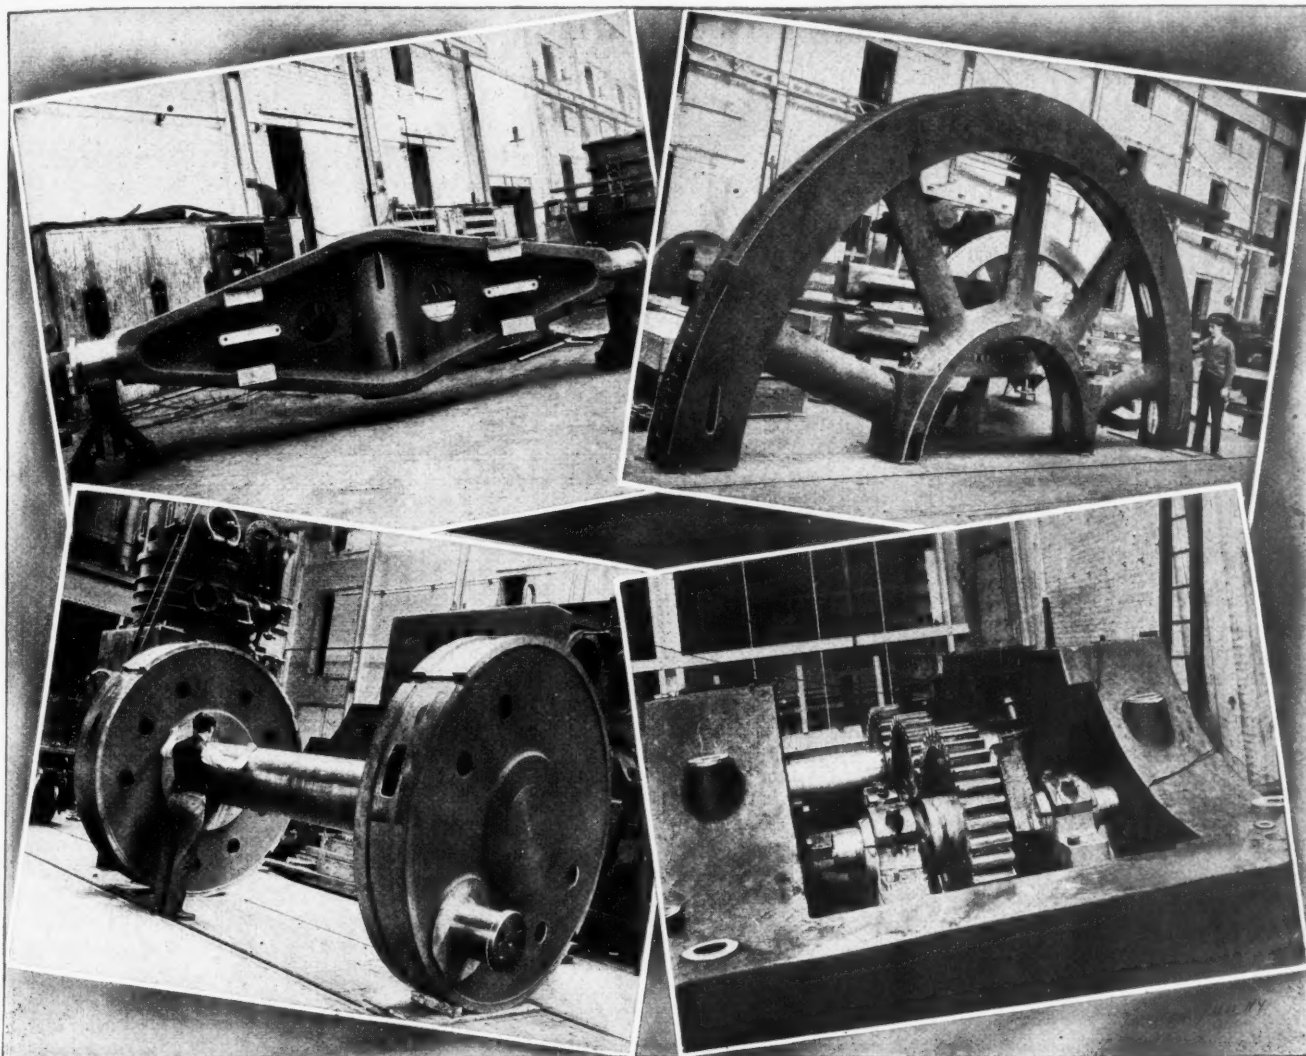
Engine Details. The Crosshead is a Steel Casting 4 feet deep and 15 feet long. The Crank Disks serve also as Hubs for the Flywheels, which are bored out to fit. The Gearing in Bedplate is for Driving an Auxiliary Crank Shaft for Operating the Valve Gear.
